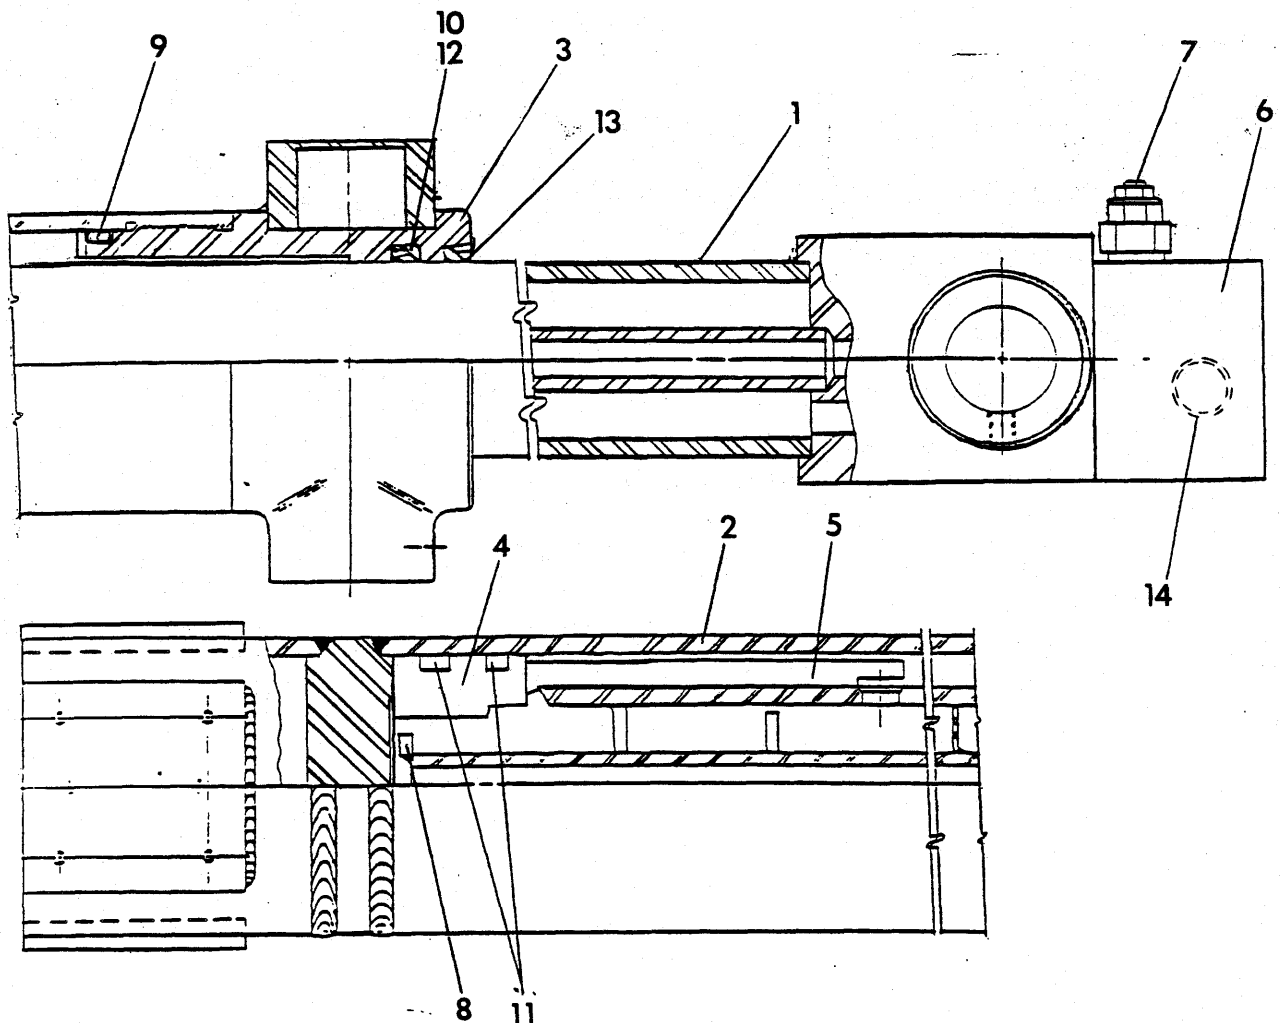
D BOOM EXTENSION ASSEMBLY (68)
